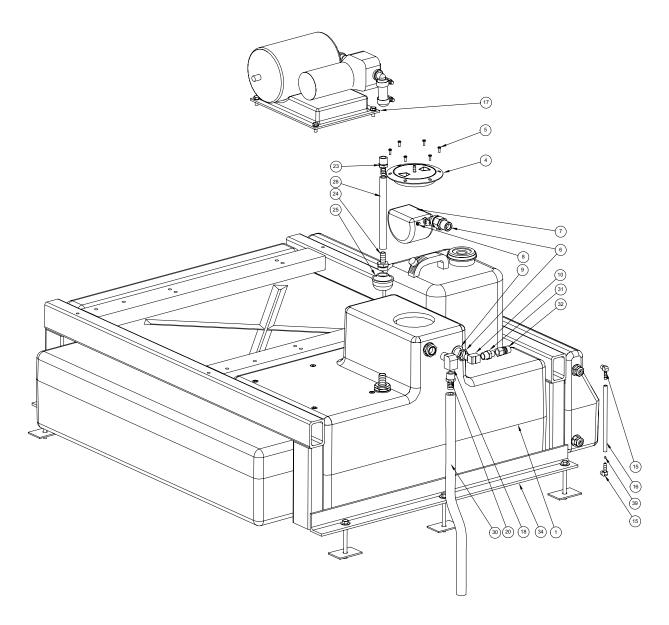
85 Gallon Rotomolded Tank Assembly - Rear View D-5566 Rev B
